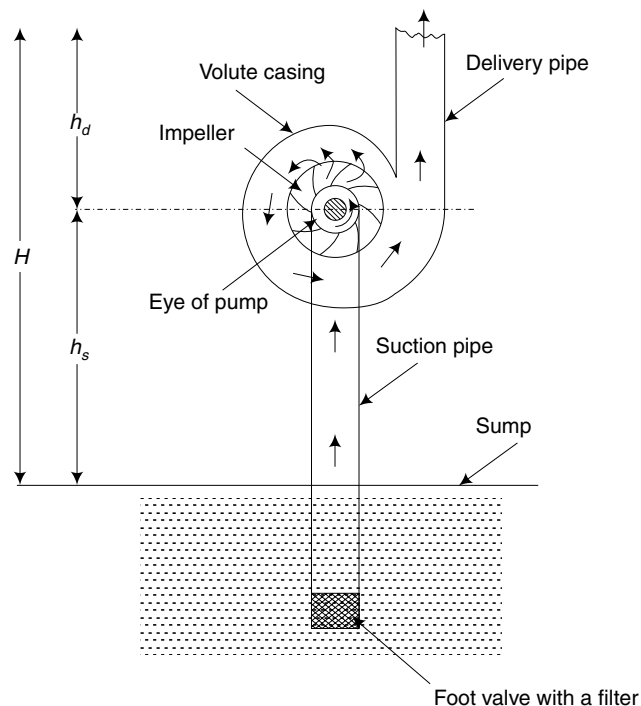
Main parts of a centrifugal pump with volute casing
